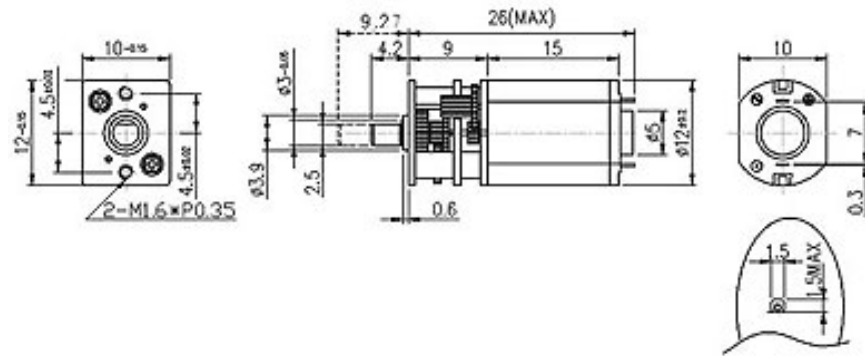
Dimensions of Pololu 298:1 Micro Gear Motor [3]
